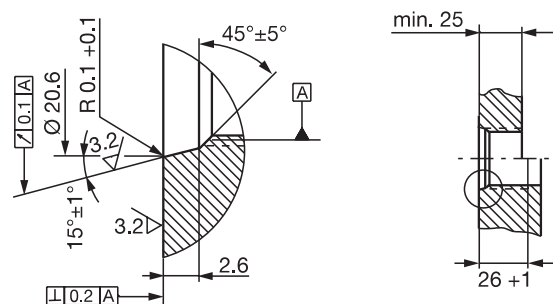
Mounting hole 3/4" 16UNF per SAE J475 O-ring 15.3x2.4
